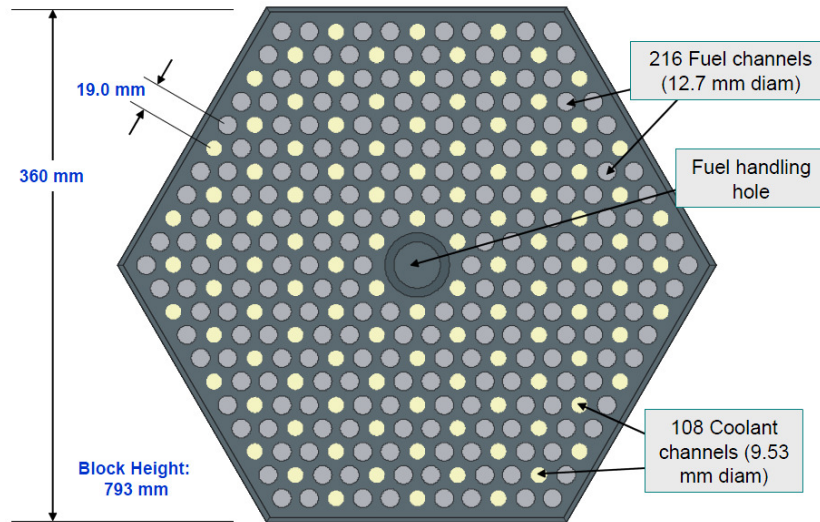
LS-VHTR hexagonal fuel assembly block [2]
